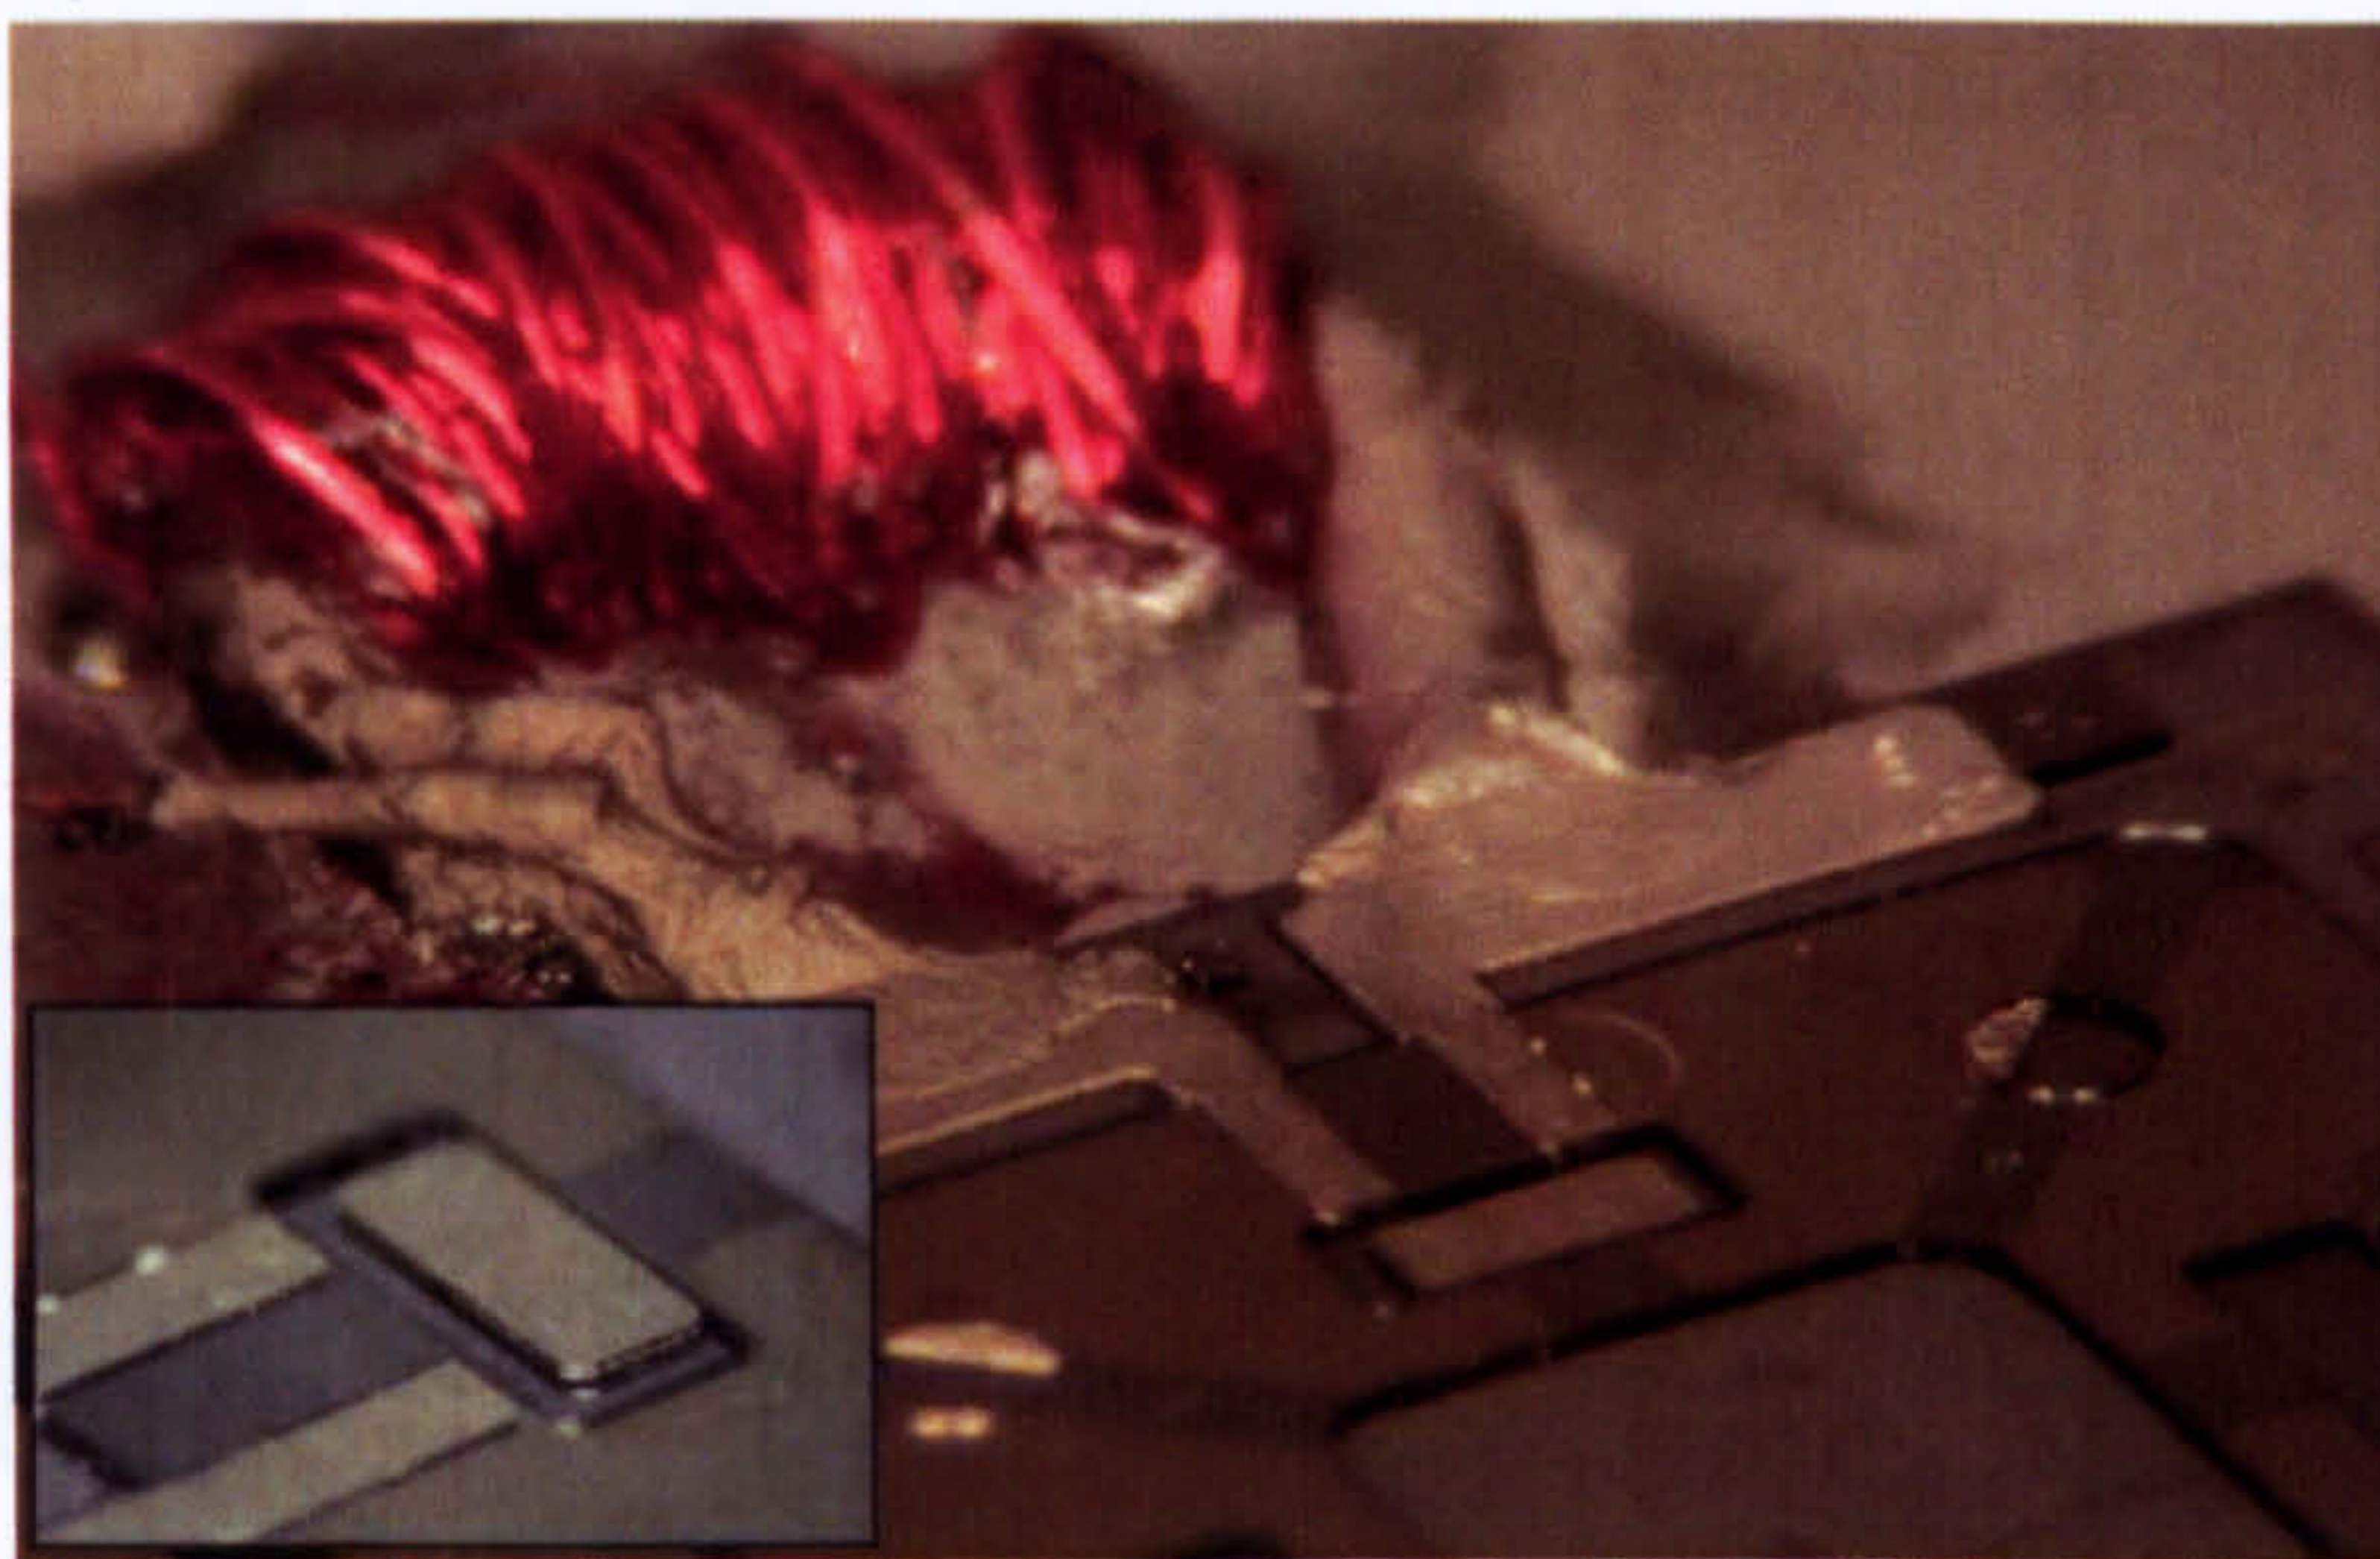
Photograph of a μ LED with attached external driving device (EDD). A post is placed within the cavity. This assembly was used for the initial test of the magnetic movement that can be achieved considering the real dimension of the assembly.
